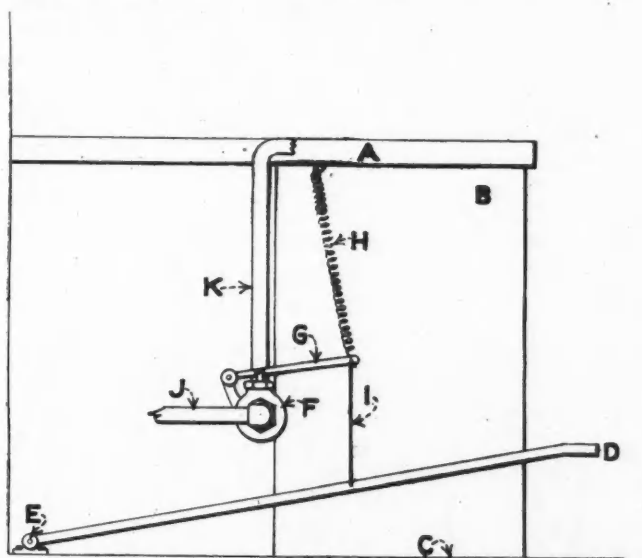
SIDE VIEW OF FOOT LEVER AND CONNECTIONS
